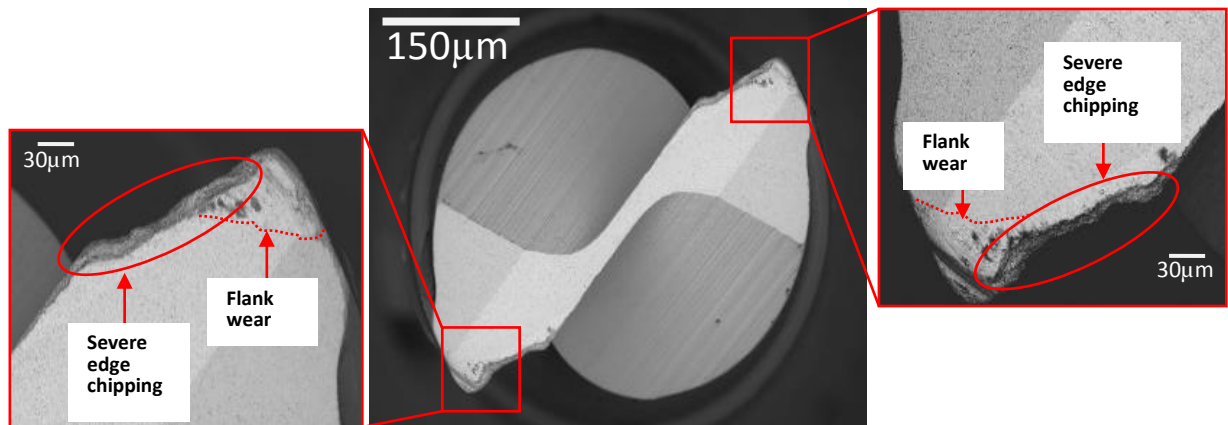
Top view of worn endmill obtained at Tool #4 (cutting speed of 62.8m/min, feed per tooth of 0.75 μm and depth of cut of 100 μm)
